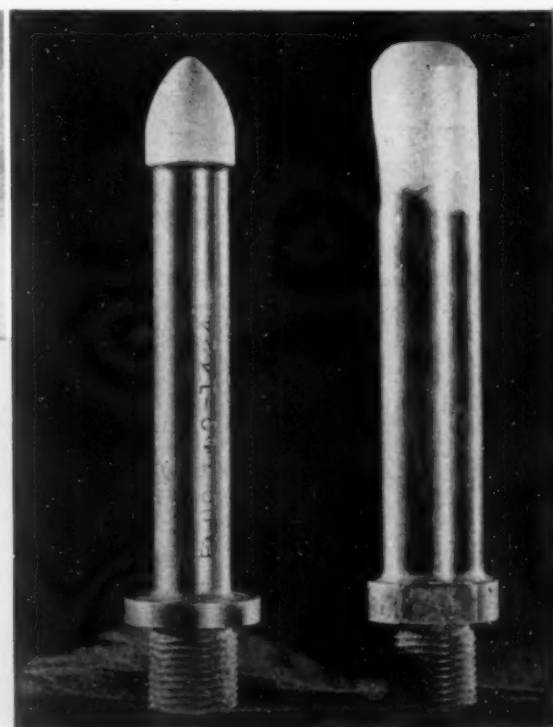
Tube expanding mandrels which have produced 50,000 parts before requiring reprocessing.
